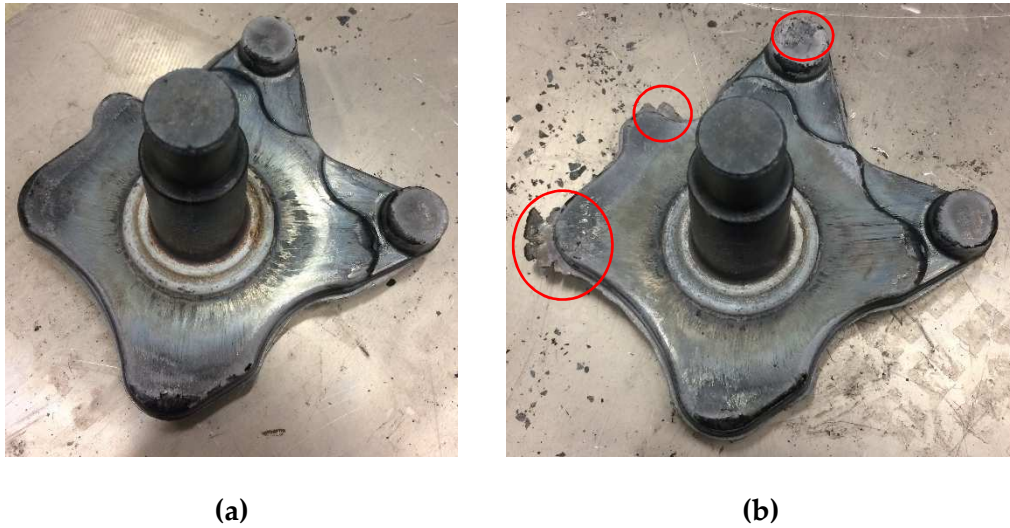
Pictures of (a) a sound component and (b) a component manufactured with a lower clamping pressure.
